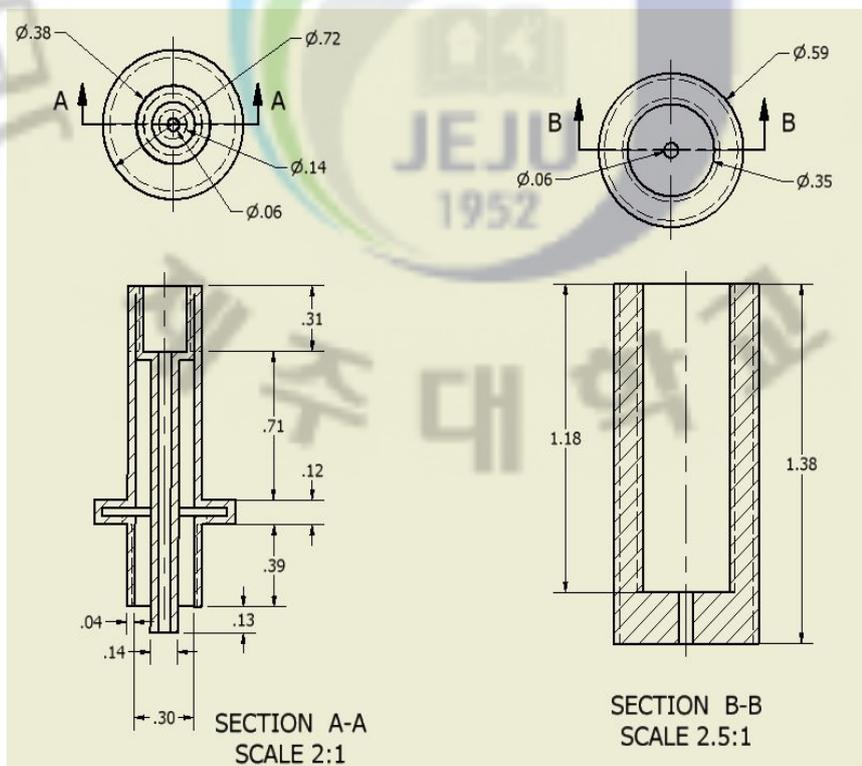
Dimensions of the upper and lower parts of the nozzle
